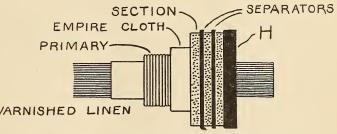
ASSEMBLY OF PRIMARY AND SECONDARY
